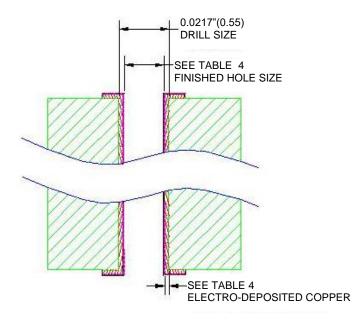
XCede® HD 21.7mil Drill and Finished Hole Size
